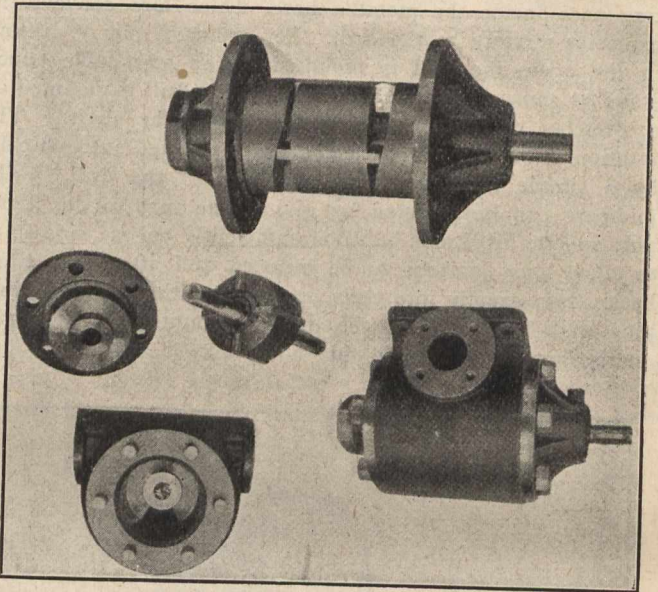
A Valveless Reversible Rotary Machine, Showing Details of Construction.
